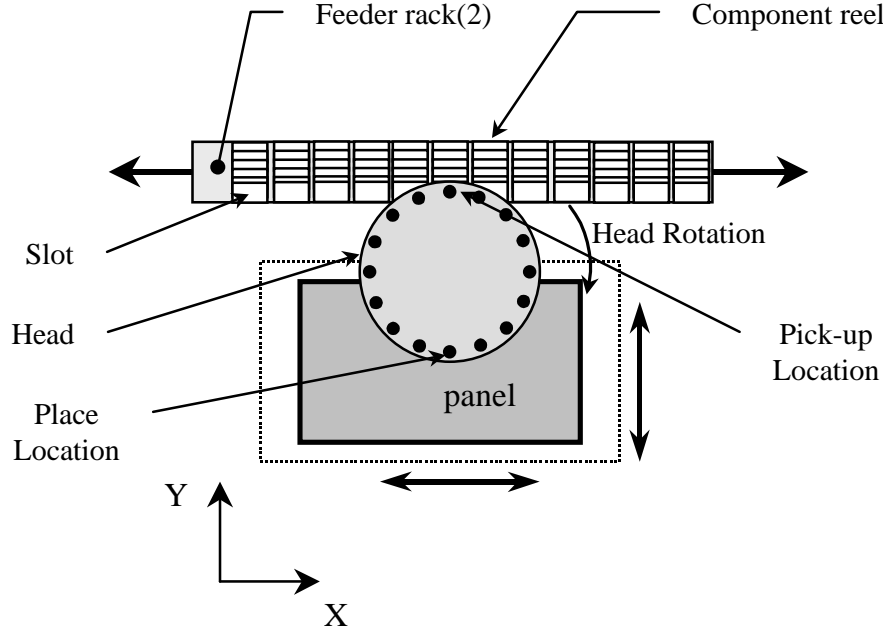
Rotary turret head machine (RTHM) schematic.
